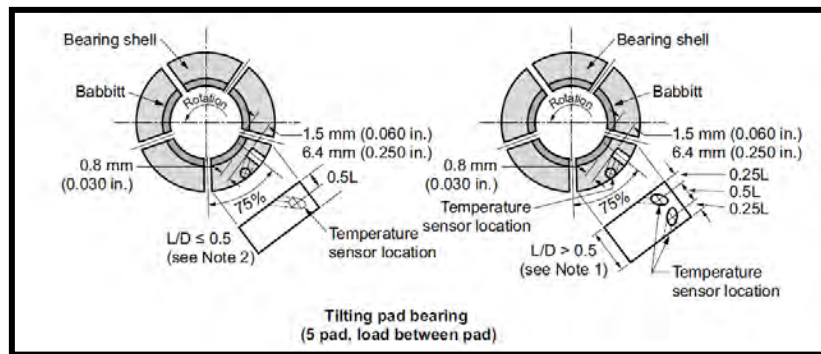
Bearing Temperature Sensor Location for Load Between Pad Design (Courtesy of API-670)
